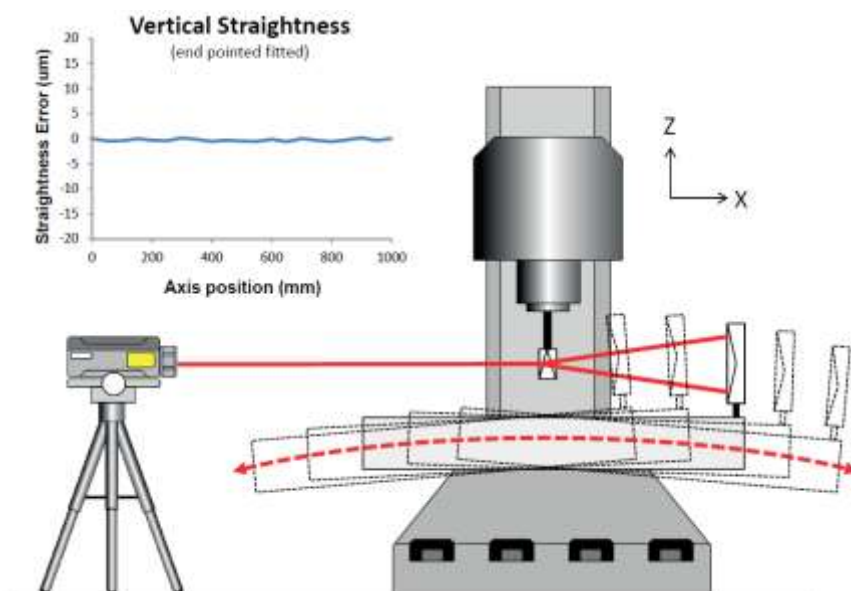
Demonstration of straightness measurement on a machine tool [44].
